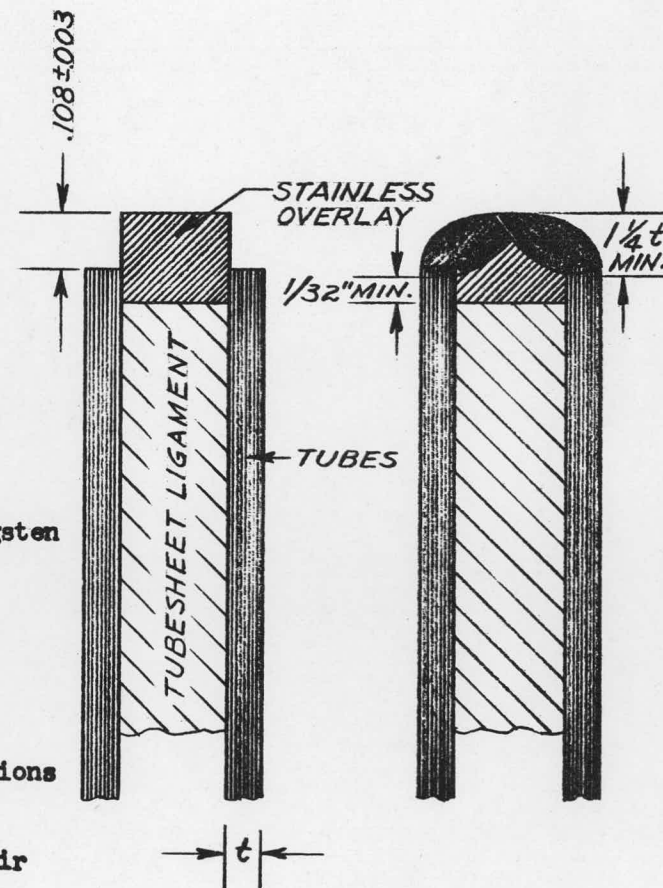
PROCEDURE FOR AUTOMATIC TUNGSTEN-ARC WELDING OF TYPE 430M TUBES TO A350-LF1(MOD.) TUBESHEETS
